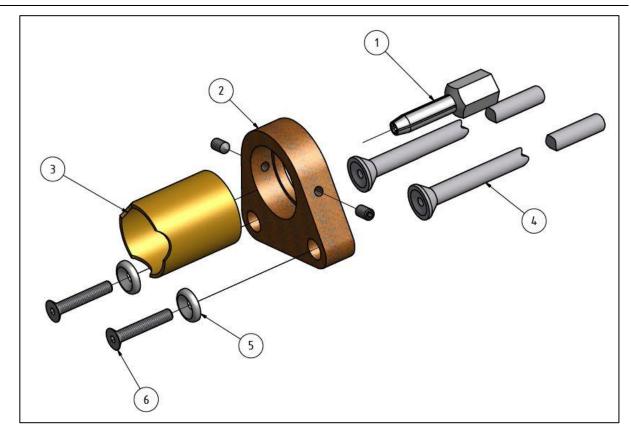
Gun accessories for short cycle stud welding without shielding gas
